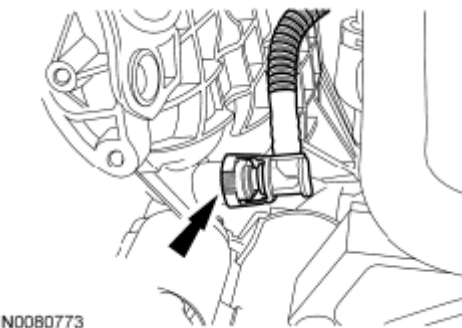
Locating Crankcase Vent Oil Separator Tube
